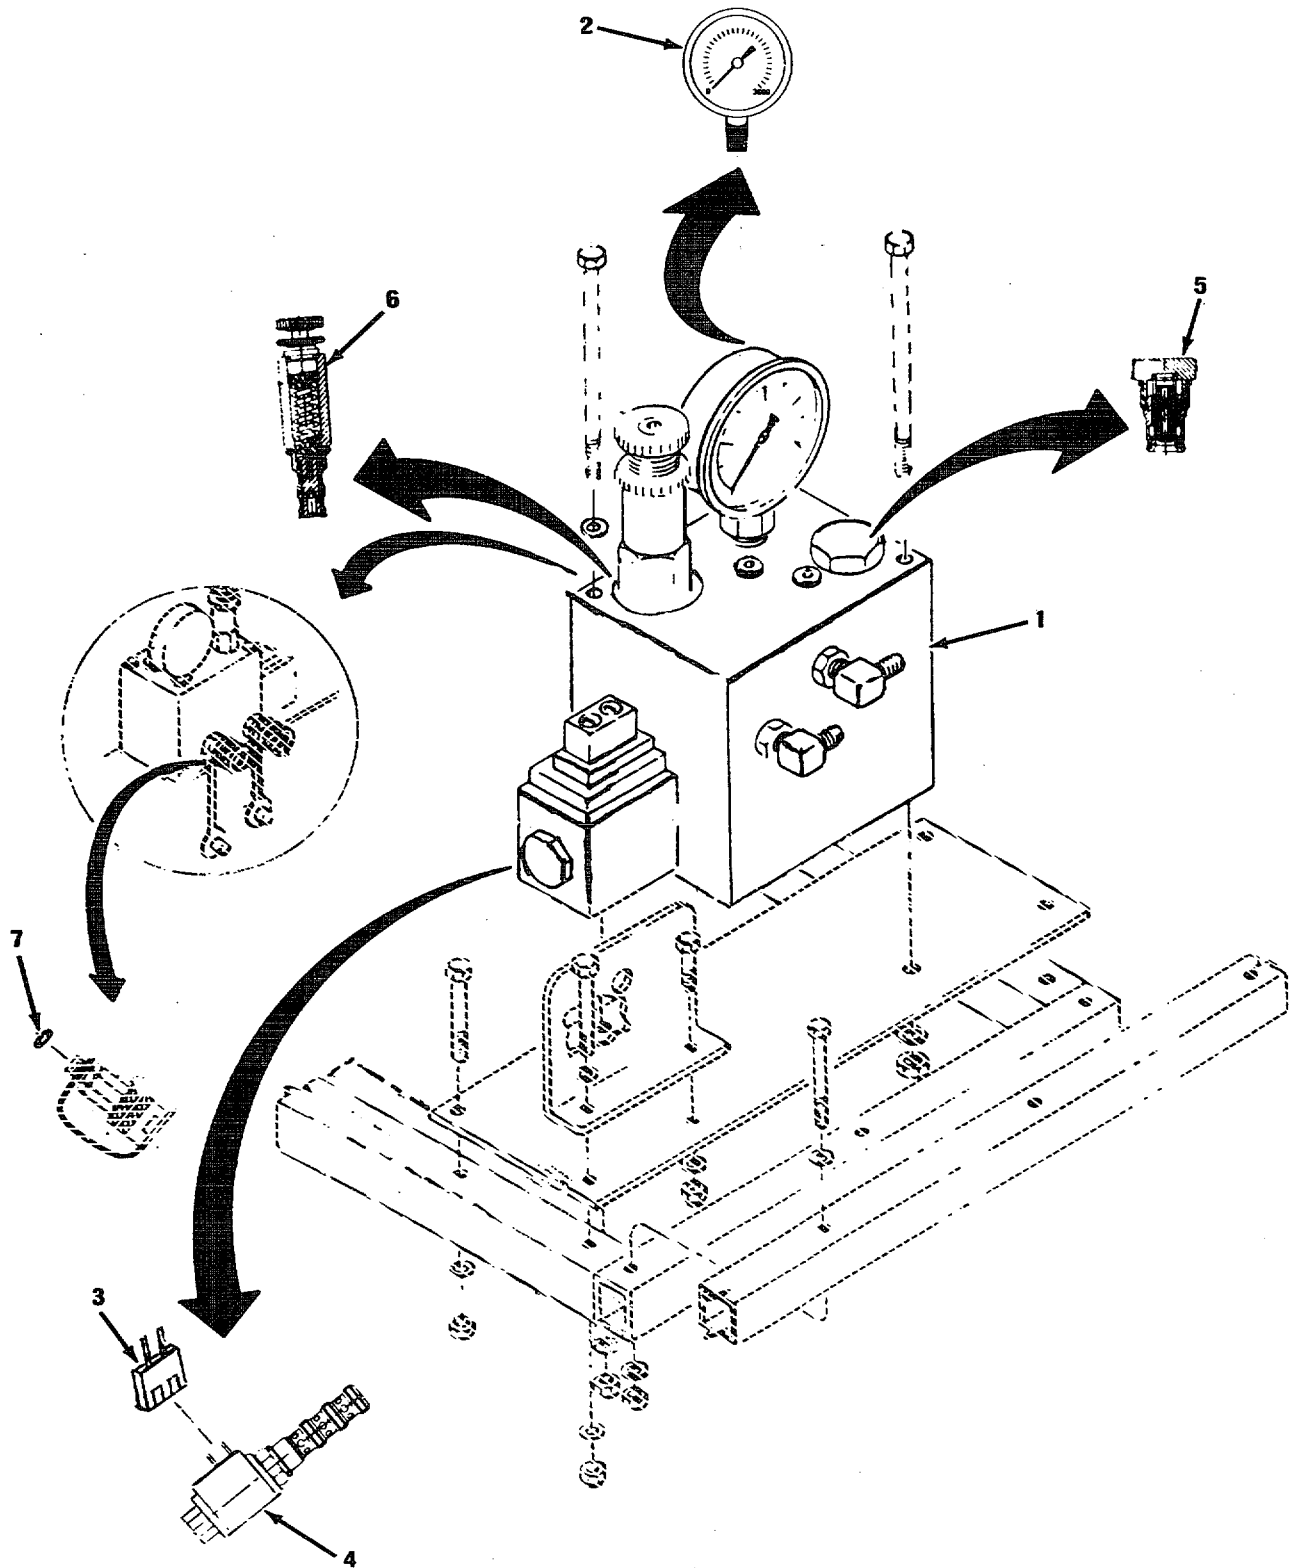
Battery/Hydraulic Assembly (Sheet 1 of 2)
